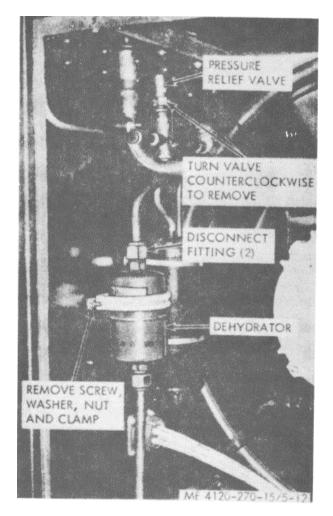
Pressure relief valve and dehydrator, removal and installation.
